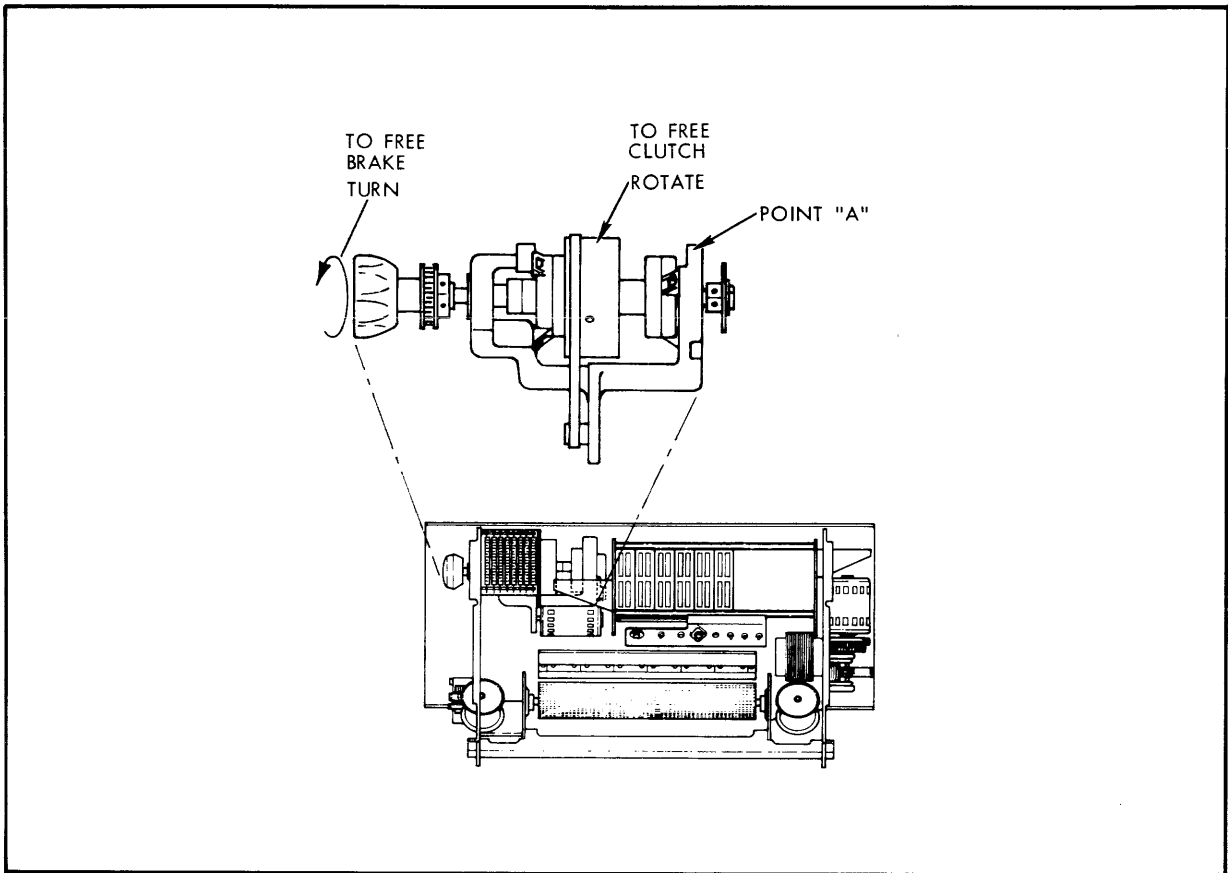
Freeing the Magnetic Particle Brake and Clutch Assemblies
